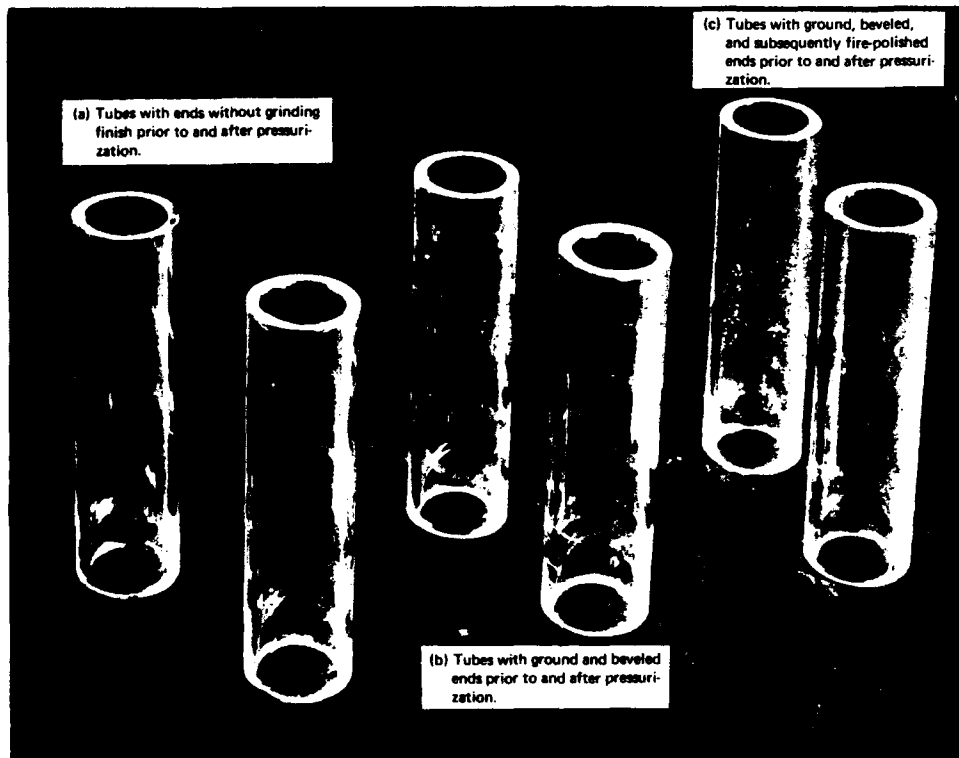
Results of pressurizing glass tubes with different seating surface finishes to 10,000 psi on type 316 stainless steel bearing plates.
